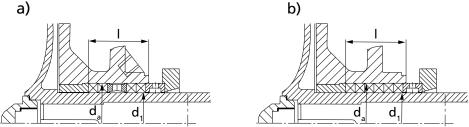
Gland packing chamber a) with lantern ring and b) without lantern ring
